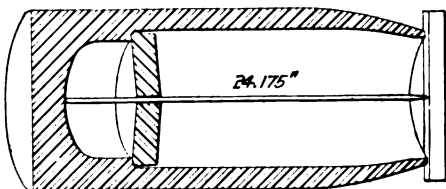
GAGE AND METHOD OF USING IT TO TEST DEPTH OF BORE
